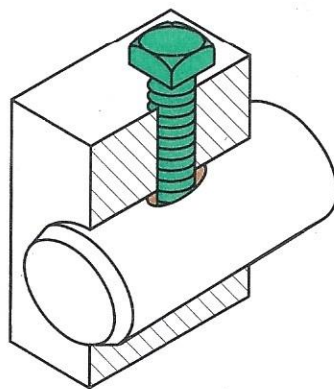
Set screws lock pulleys and gears to shafts to prevent rotation of shaft in hole. Note recessed area on shaft.
